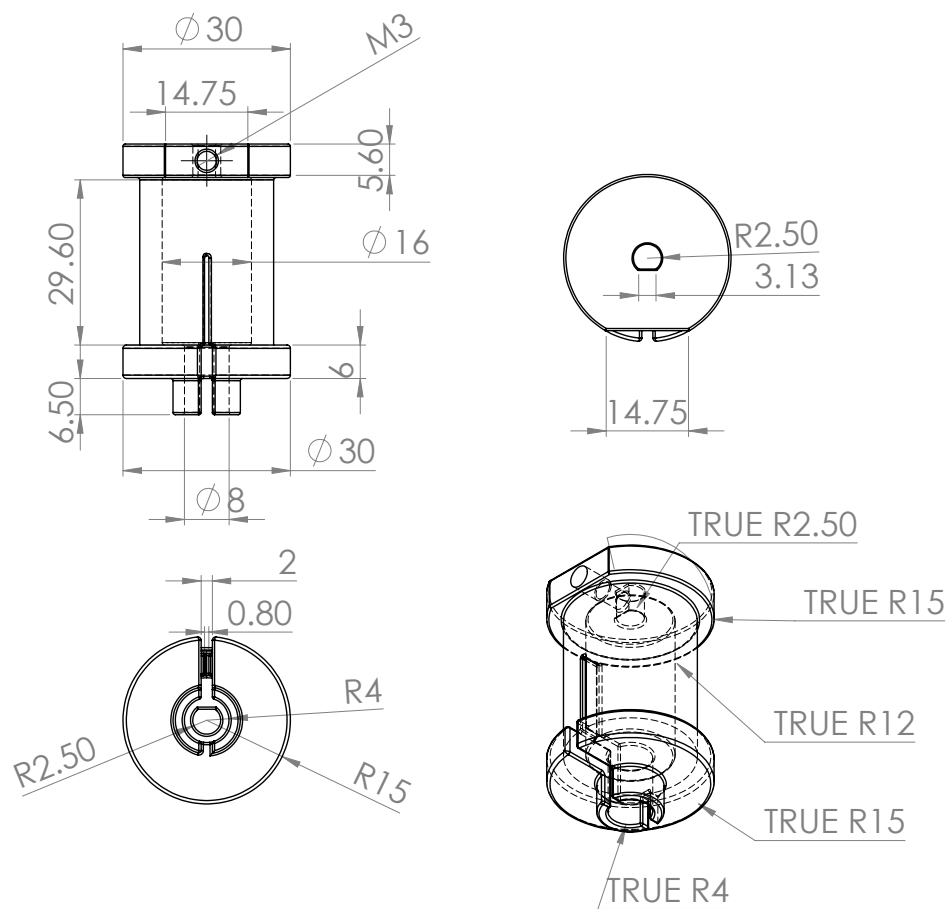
Technical drawing of the 3D printed spools in the FU (mm). Final prototype.
